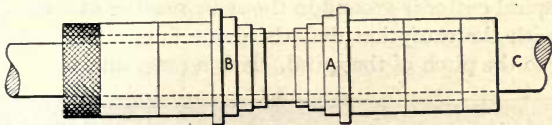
Hollow work arbor for locating milling cutters for grinding.
